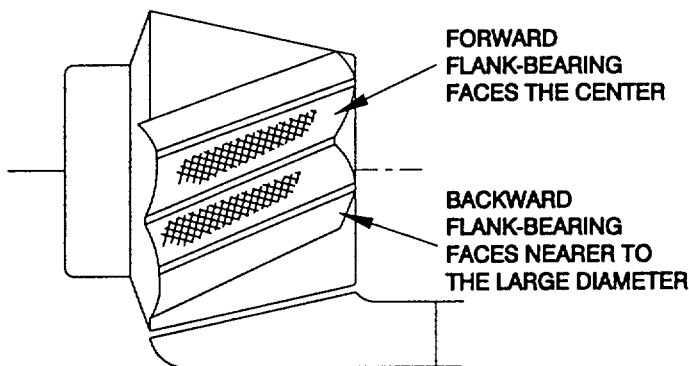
Proper Fit of Bevel Gear When Unloaded.
